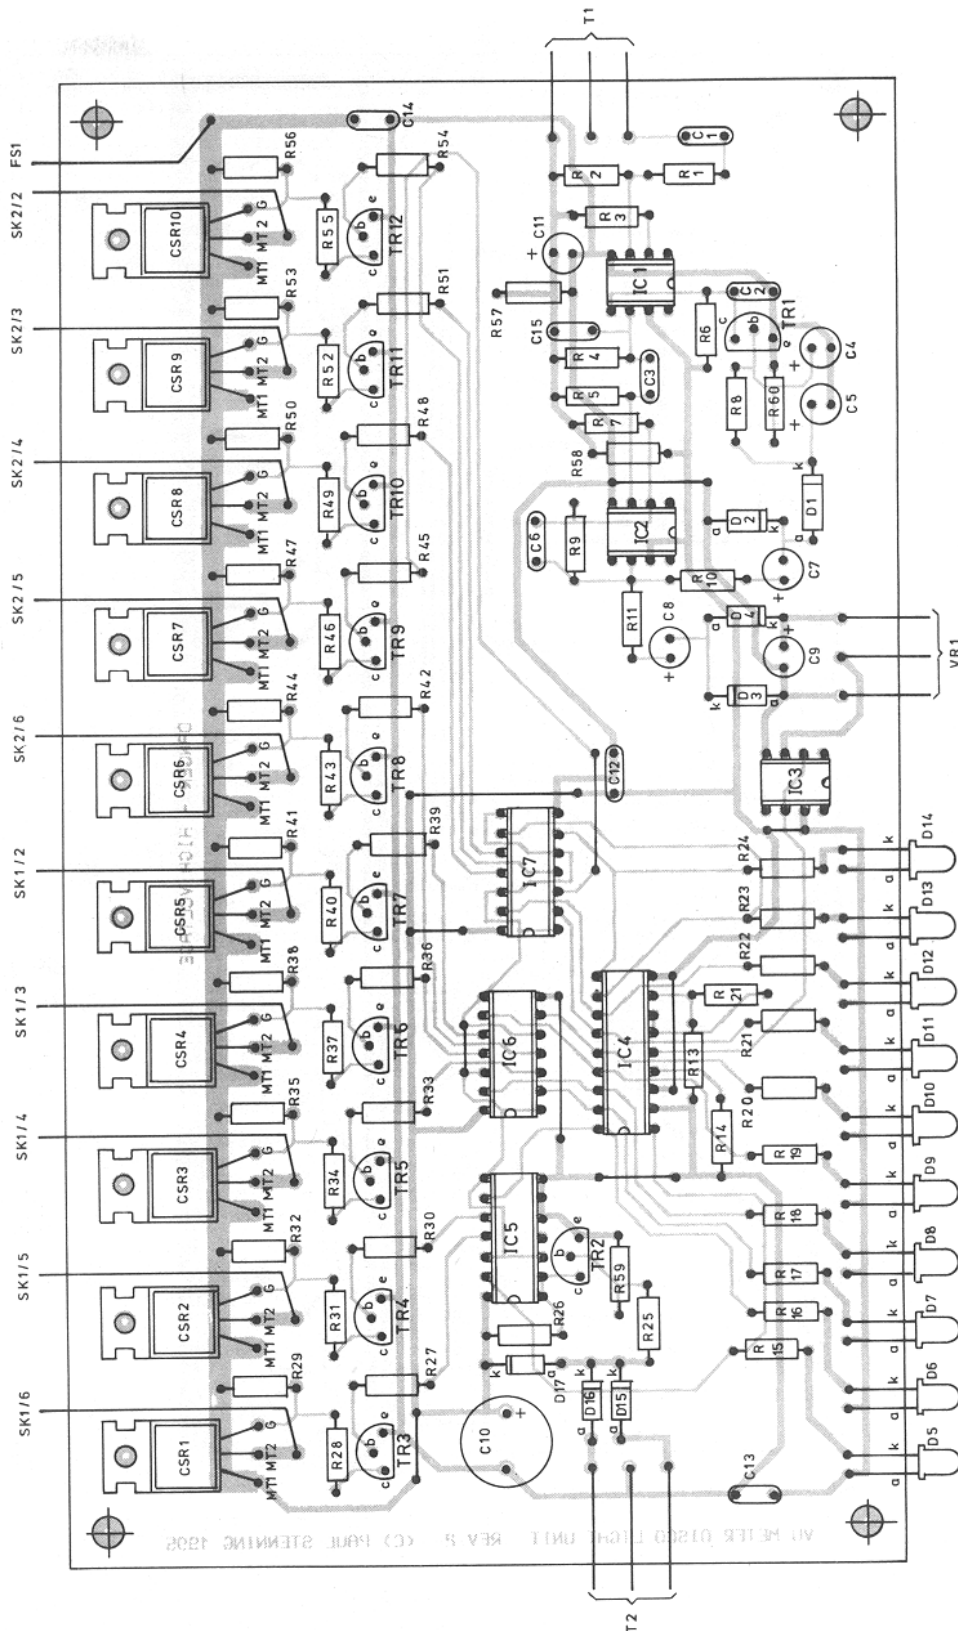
Component layout for the Gigantic VU Meter p.c.b.
